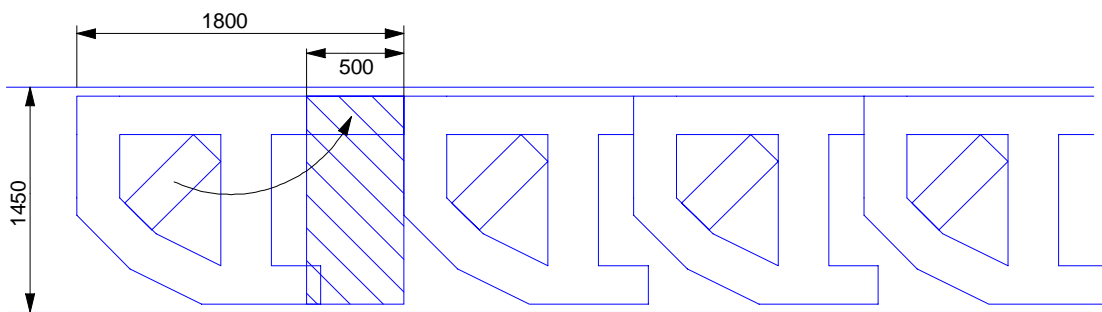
By utilizing stock that would otherwise be engineered scrap and making tailor welded blanks, blank nesting is improved and purchased stock reduced by 28%.
